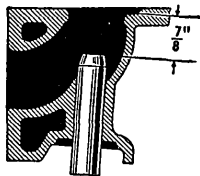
Position of valve stem guides in six cylinder L-Head engine. 1948-52
